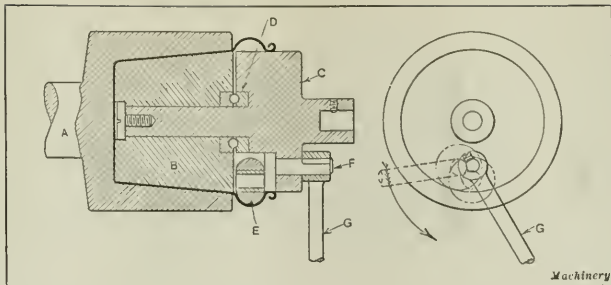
Producing a Bulge near the Open End of a Drawn Shell
